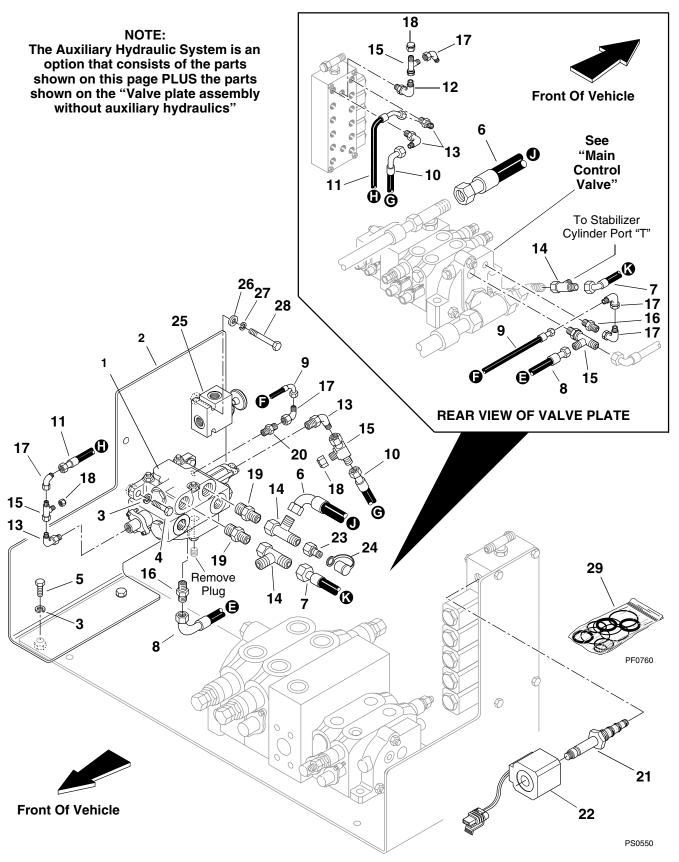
Valve plate assembly (with auxiliary hydraulics)
